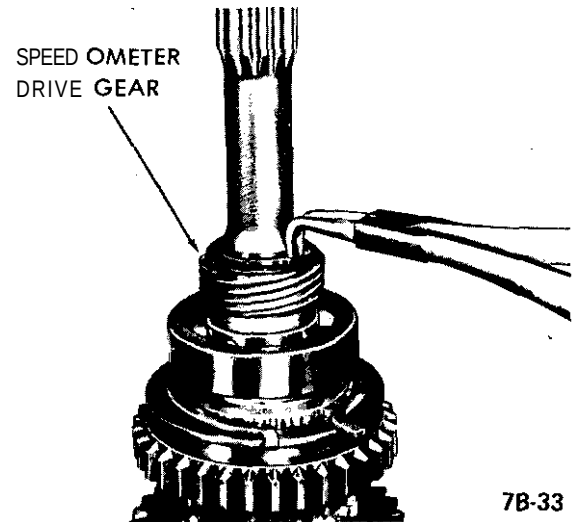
B-33 Removing Snap Ring Behind Speedometer Drive Gear
